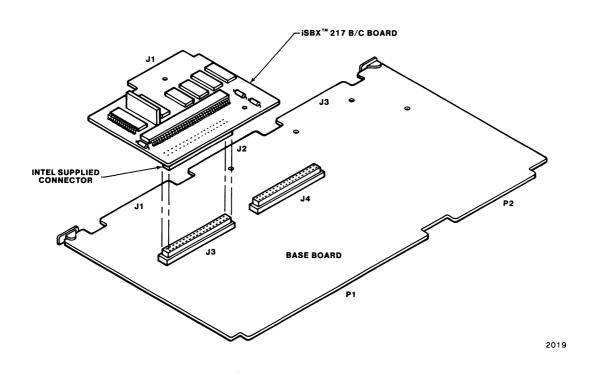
iSBX<sup>IM</sup> 217B/C Board Installation
